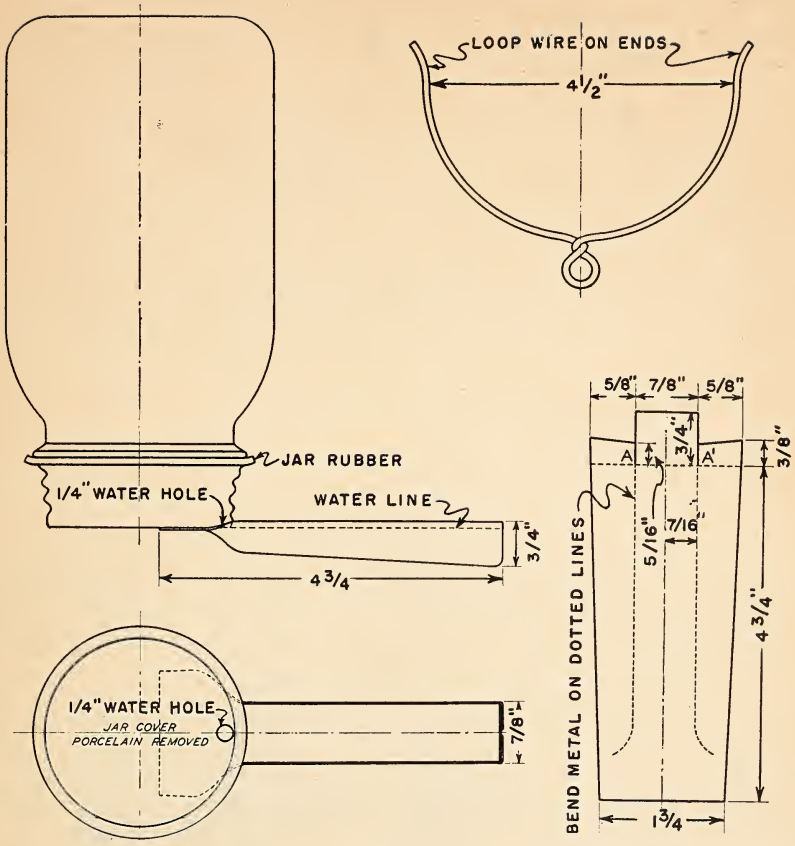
Construction details of a water fountain made from a fruit jar.
